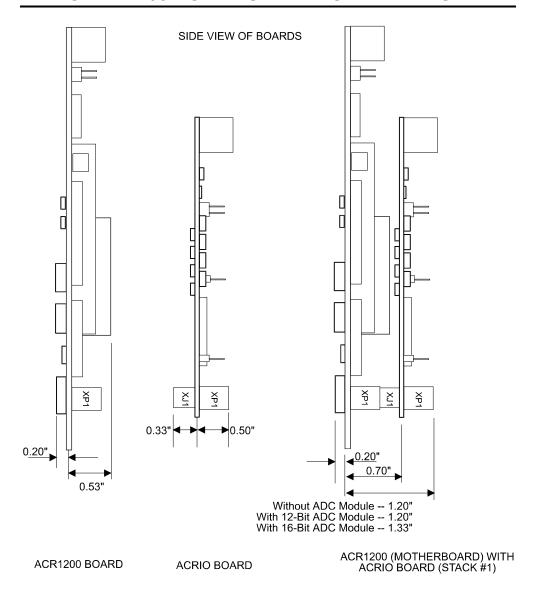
ACR1200 Board Stacking Mechanical Dimensions Examples
